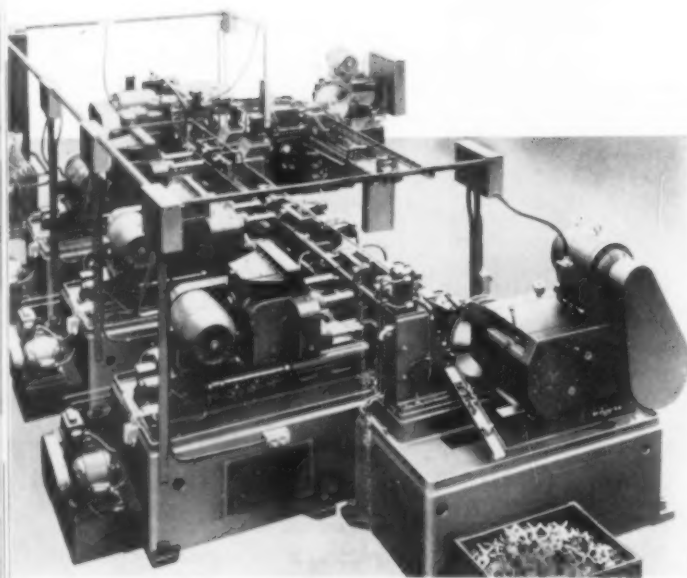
Automatic transfer line, which produces 384 cylinder brackets per hour from angle-iron stock, begins and ends with circular sawing operations.
